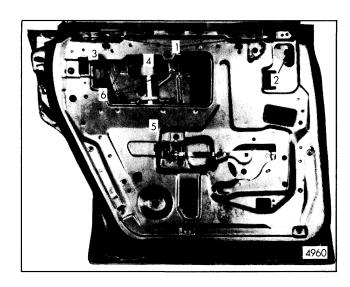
Rear Door Window Removal and Adjustments - "A-29,35" Styles
